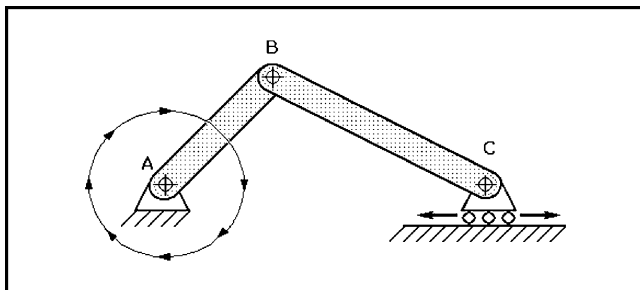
Slider-crank mechanism: This simple crank converts the 360° rotation of driver link AB into linear motion of link BC, causing the slider at C to reciprocate.
